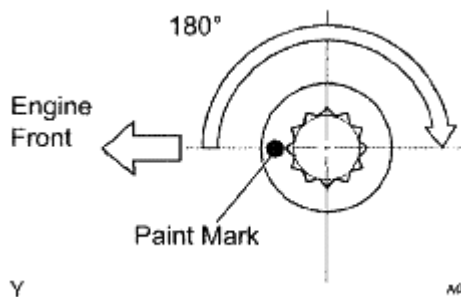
Identifying Cylinder Head Bolt Tightening Sequence (Bank 1 4WD And Pre-Runner)
